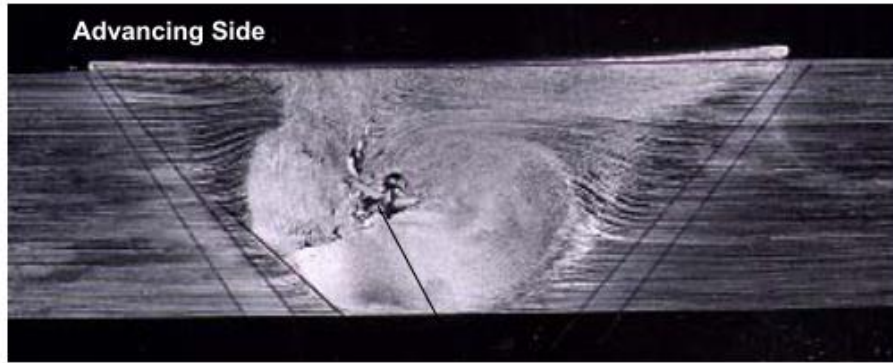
Example of Chip Lack of Fill in Friction Stir Welded Joints
